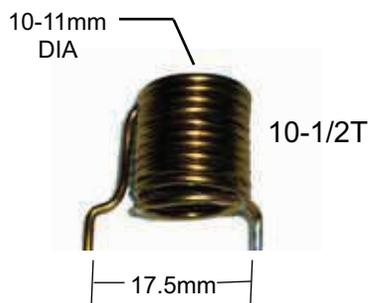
L1 can be formed by winding 10-1/2 turns of d1.0mm magnet wire on a 10-11mm diameter form.
